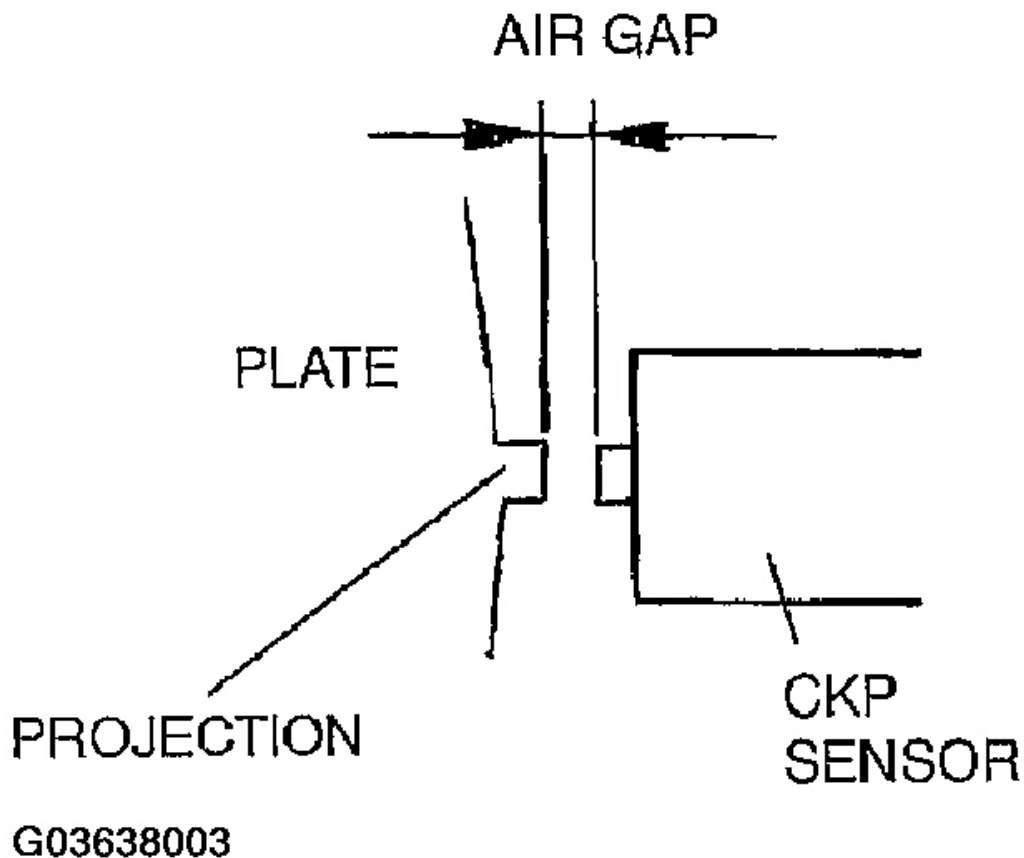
Measuring Air Gap Between Projections Of Plate Behind Crankshaft Pulley And CKP Sensor
